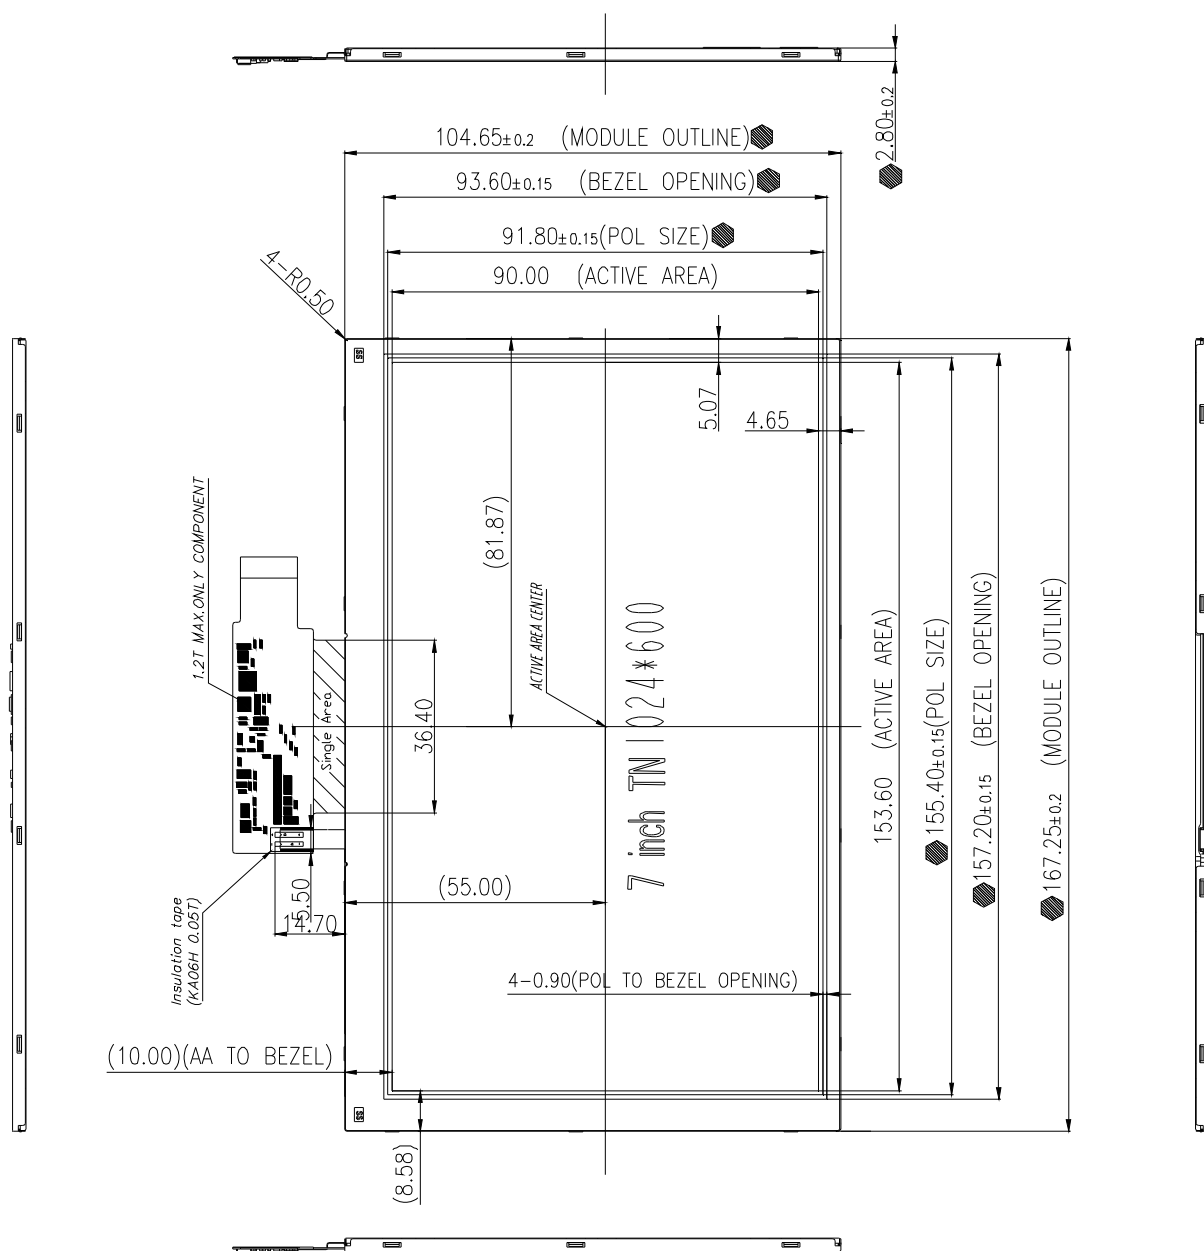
TFT-LCD Module Outline Dimensions (Front view)
